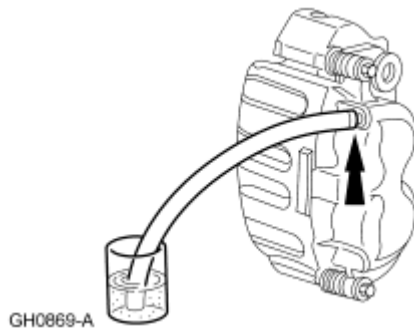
Attaching Rubber Drain Hose To Disc Brake Caliper Bleeder Screw
